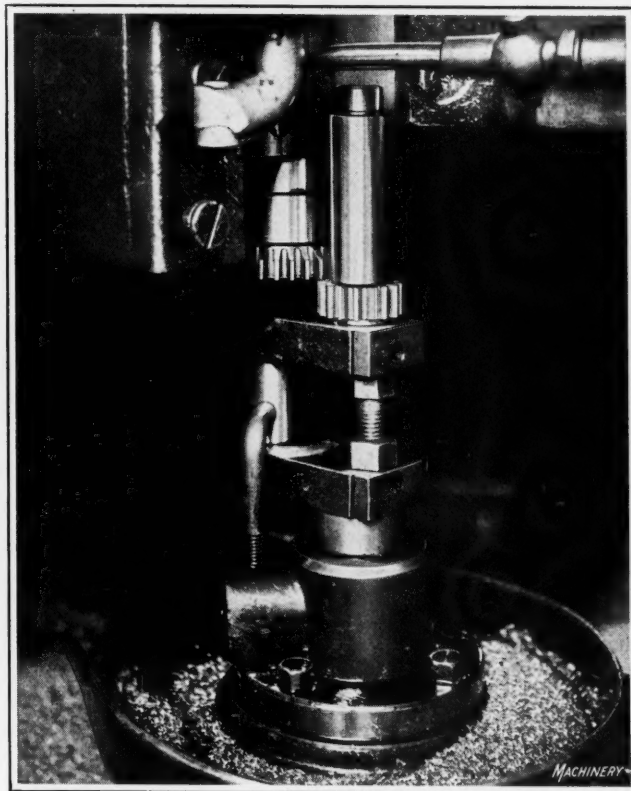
Cutting Gear Teeth Close to Crankshaft Web, using Push Stroke
